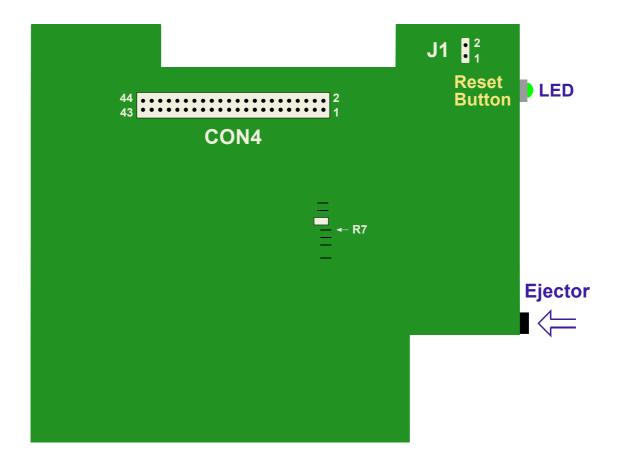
CP306-V-IOIDE Module Layout - Bottom View
